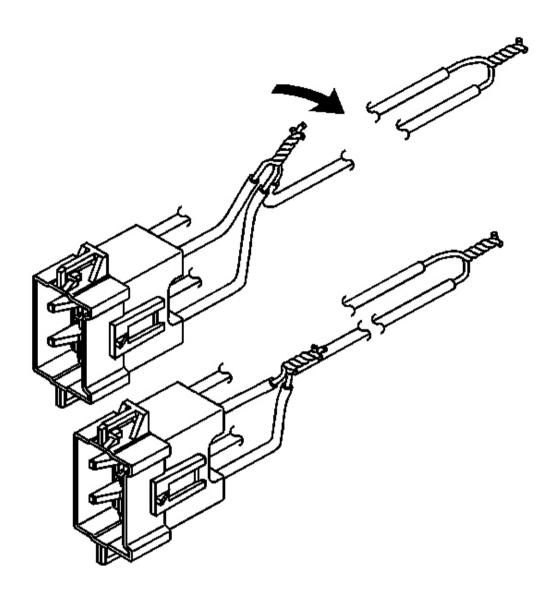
Bending Twisted Connection Flat Courtesy of GENERAL MOTORS CORP.
